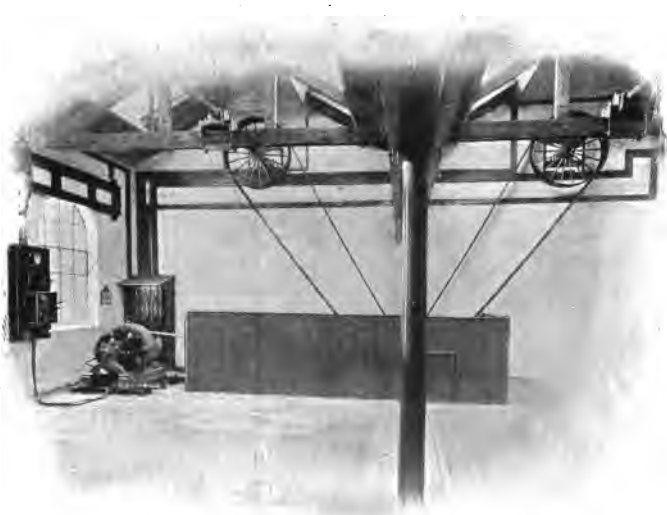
Motor driving Countershaft (Mather and Platt).
